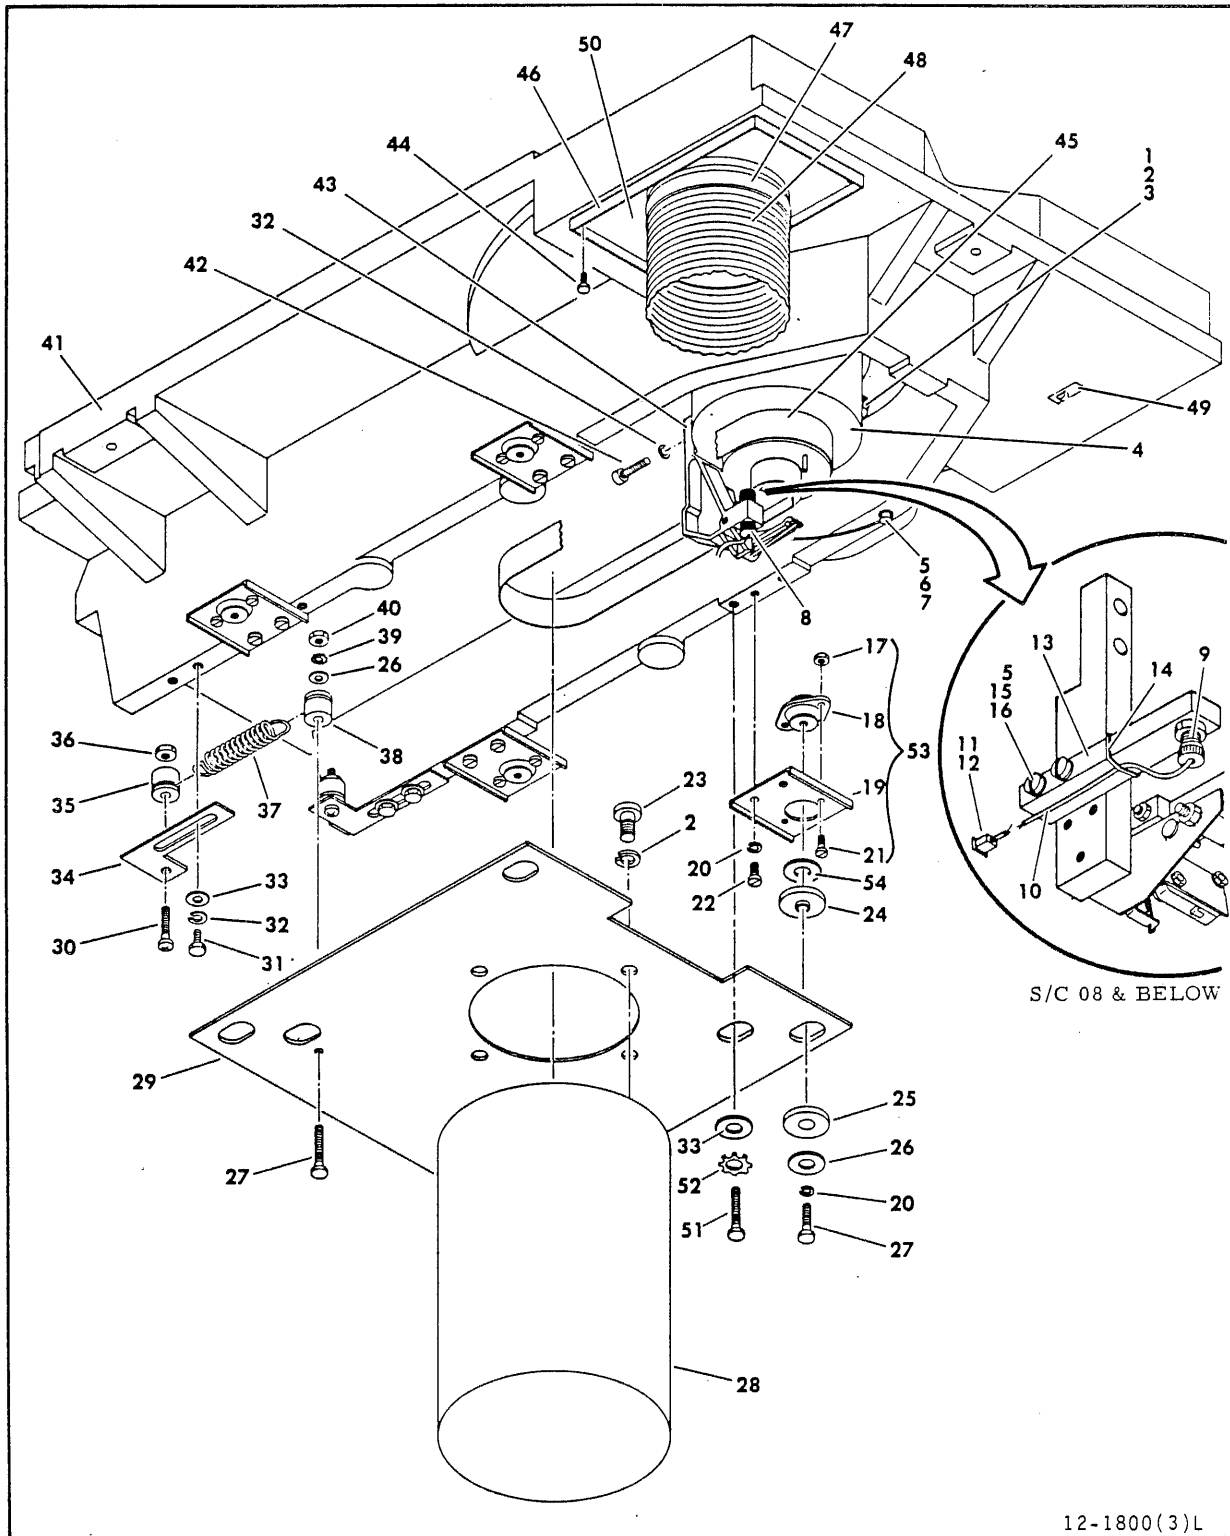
A-20. Deck Assembly (Sheet 2 of 3)
